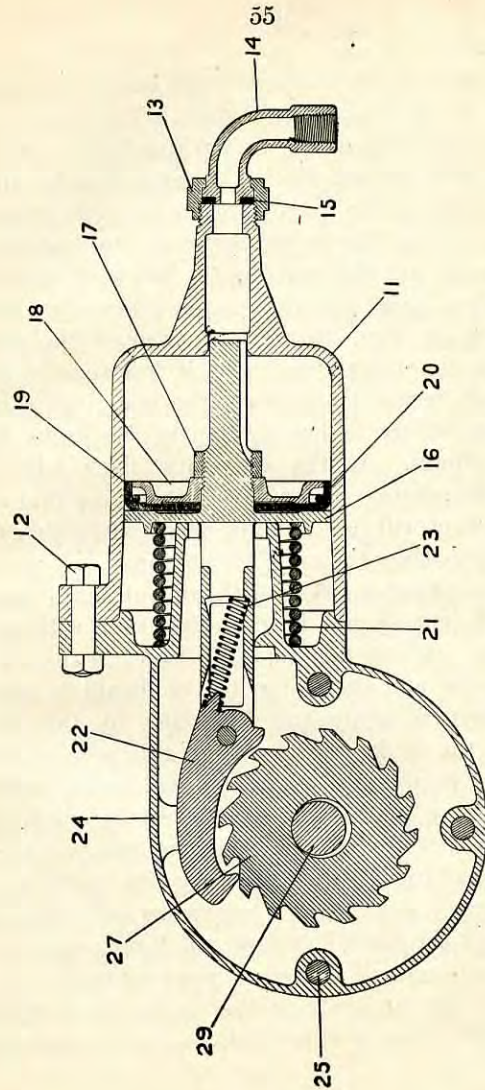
Automatic Slack Adjuster, Ready To Take Up Slack.
